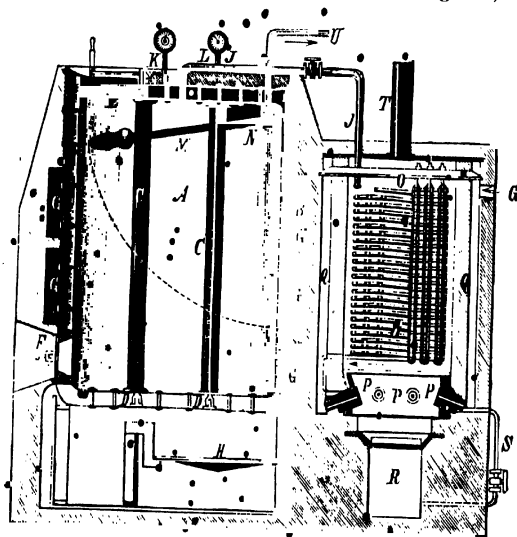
Steam plant for tallow melting.—A, sheet-iron pan; B, jacket; C, steam pipe; D, stay rods; E, manhole; F, outlet; G, flue; H, hearth; J, pipe leading to furnace; K, pressure gauge of steam jacket; L, pressure gauge of digester; M, exhaust pipe with strainer; N, swivel joint; O, system of tubes; P, burner; Q, opening and air chamber; R, hearth; S, tube; T, flue; U, outlet pipe.
